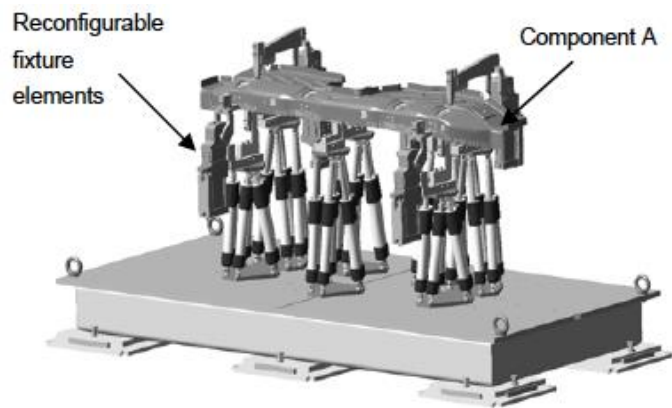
Illustration of 6 Hexapods fixating a workpiece
